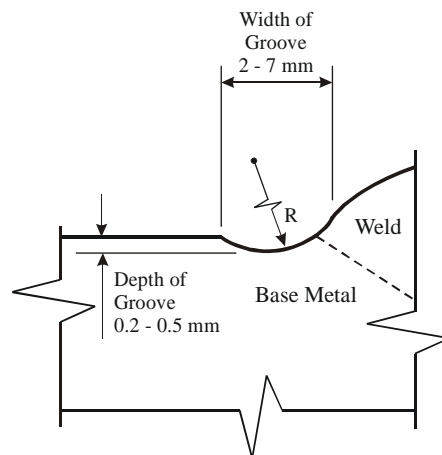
Improved weld toe profile due to ultrasonic peening [Kudryavtsev et al. 2004].
